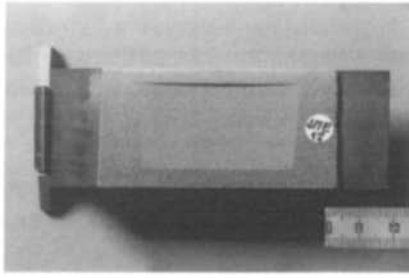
The APS coating remains smooth after abrading. The 0.7 mm thick blade tip displays no wear (the original machining marks, perpendicular to the running direction are still visible).
